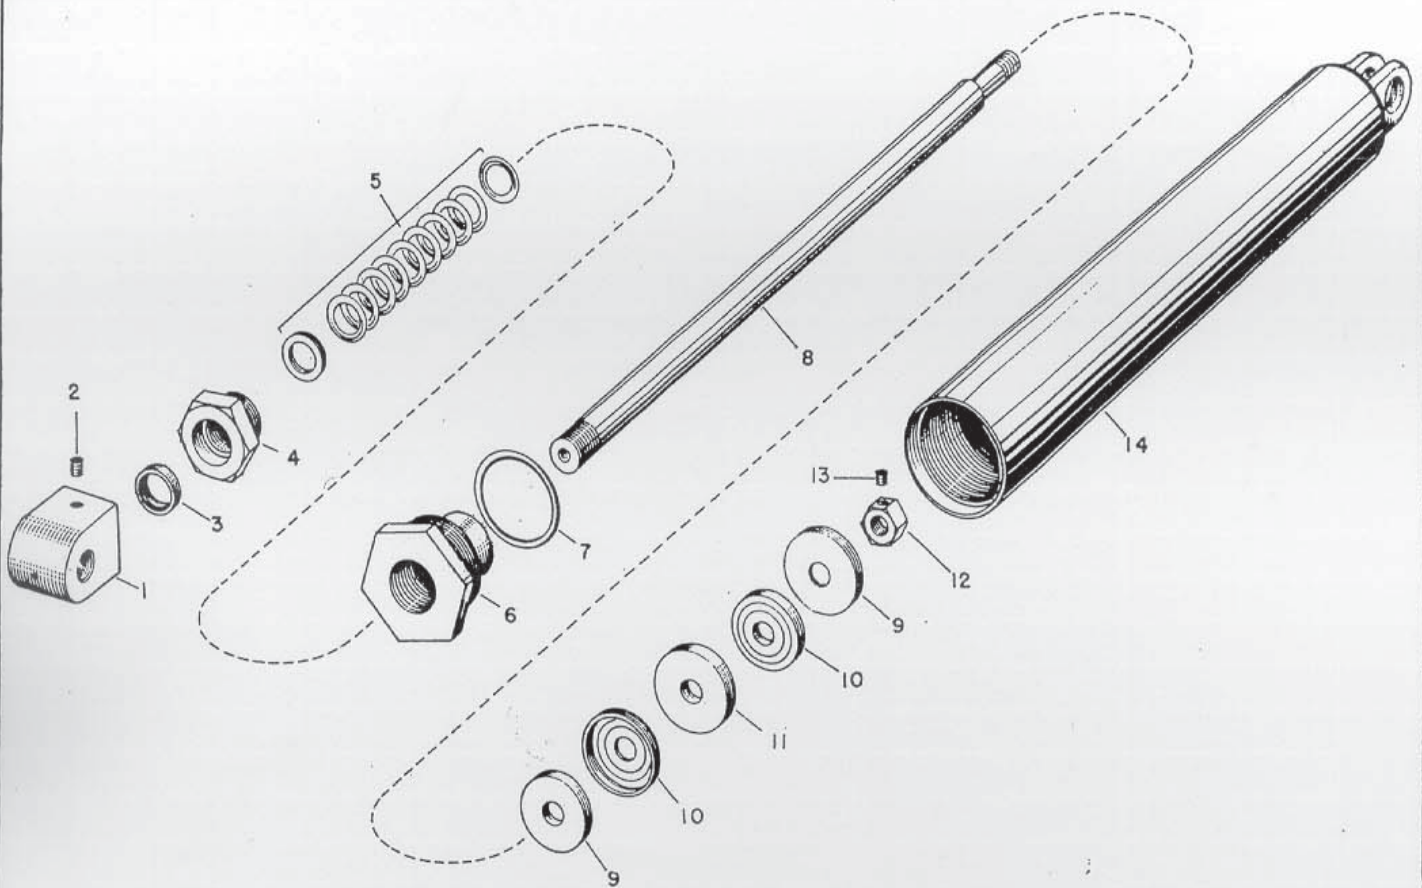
Hydraulic Double Acting Cylinder with 1 1/4-inch Piston Rod – WM3 only
